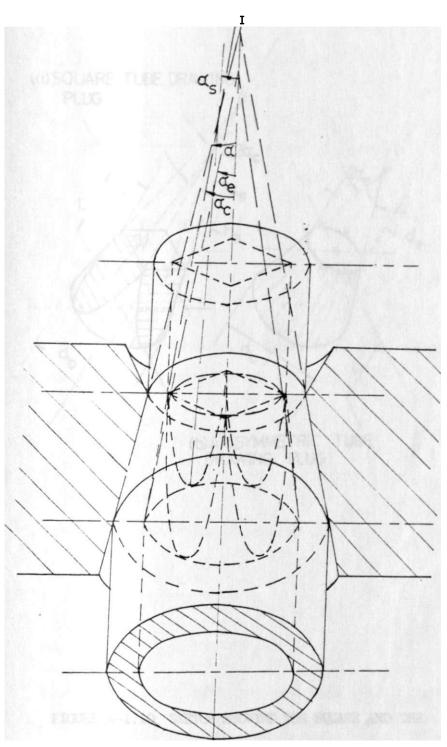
SKETCH SHOWING THE DRAWING OF REGULAR POLYGONAL TUBE FRCM ROUND THRGjGH A CYLINDRICAL DIE
